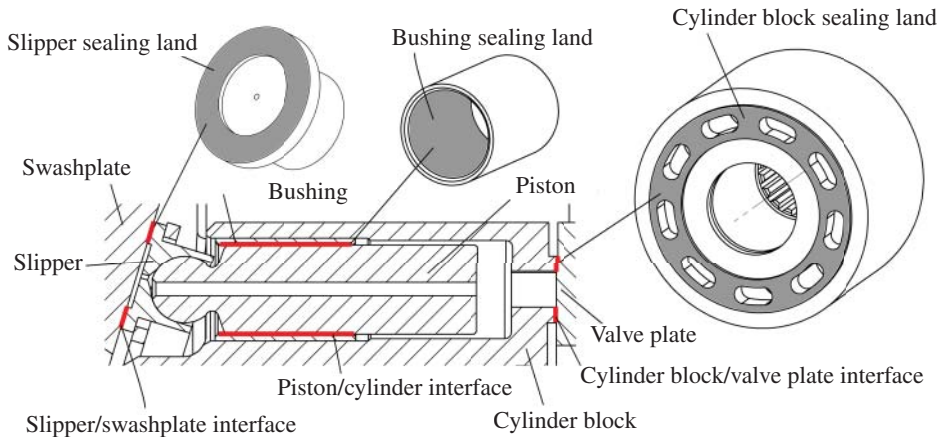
Three lubricating interfaces in swashplate-type axial piston machines.
